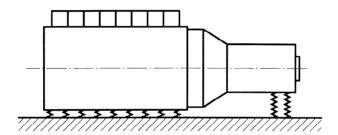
Assembly with flange housing and resilient mounting on the engine and generator
